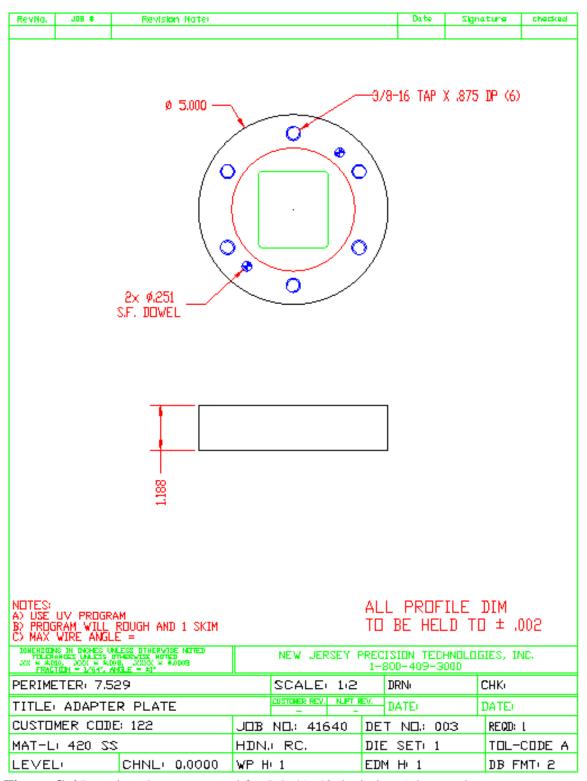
Drawing sheet generated for Job 41640 depicting Adapter plate.
